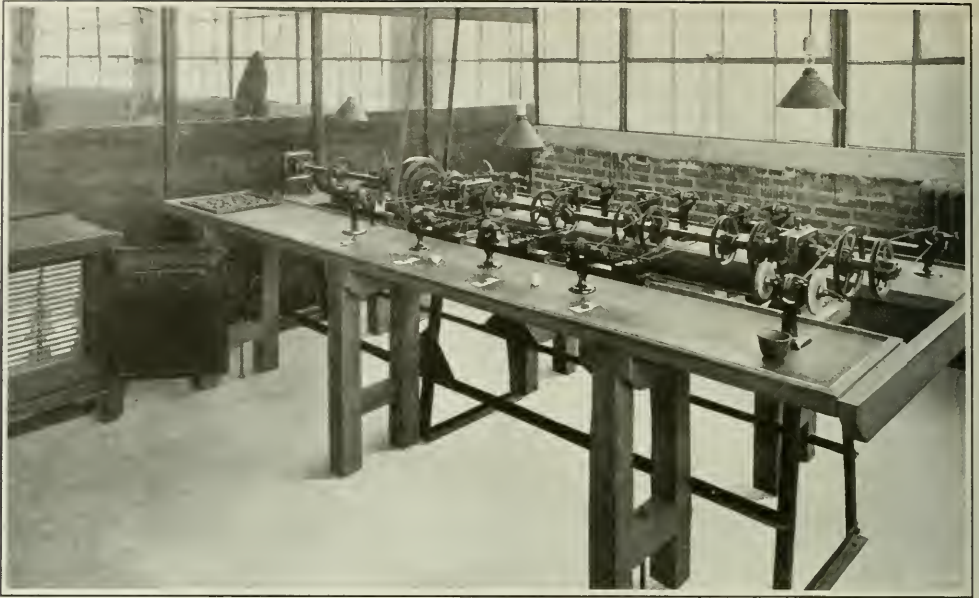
Corner of the Diemaking Room where the Drawing Hole is lapped through the Diamonds
